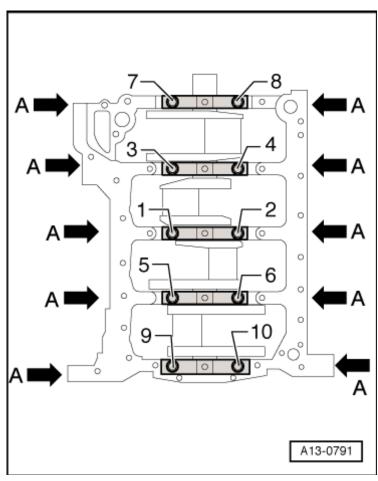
Crankshaft Bearing Cap, Installing Courtesy of AUDI OF AMERICA, LLC
